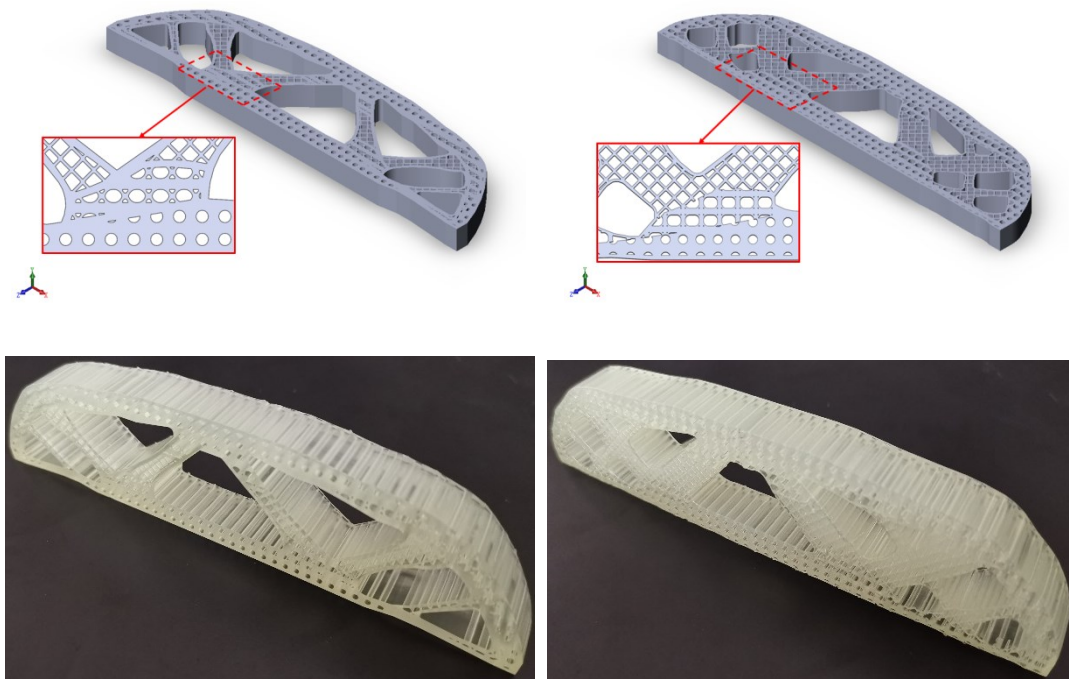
The reconstructed CAD models and manufactured samples of the multi-scale designs
